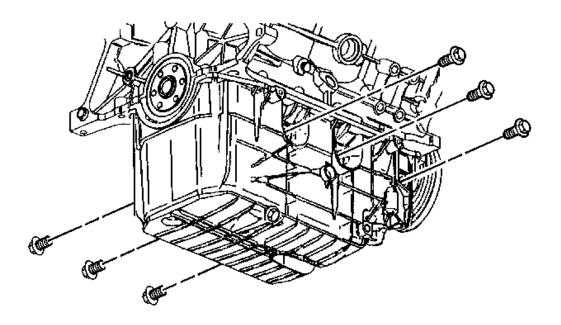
Installing Left Oil Pan Side Bolts Courtesy of GENERAL MOTORS CORP.
